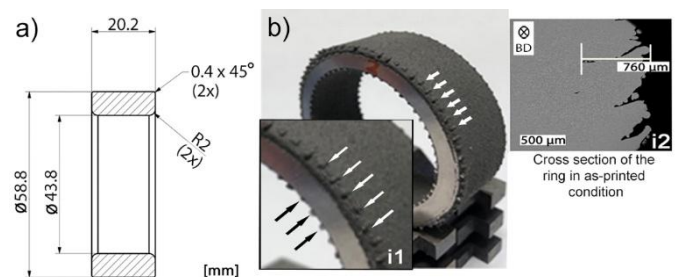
a) Geometry and principal dimensions of the additively manufactured ring. (b) As-printed rings with surface undulations along the build direction (arrows); inset (i1) shows a detailed view. (i2) Cross-section indicating a surface irregularity height of ~760 µm relative to the build direction (BD) parallel to axial direction.
